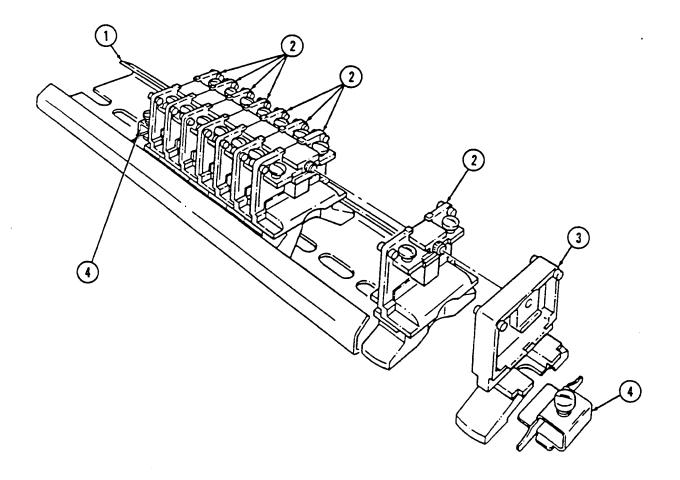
Channel, 6.00-in. (152.4 mm) and Terminal Block Assembly.
